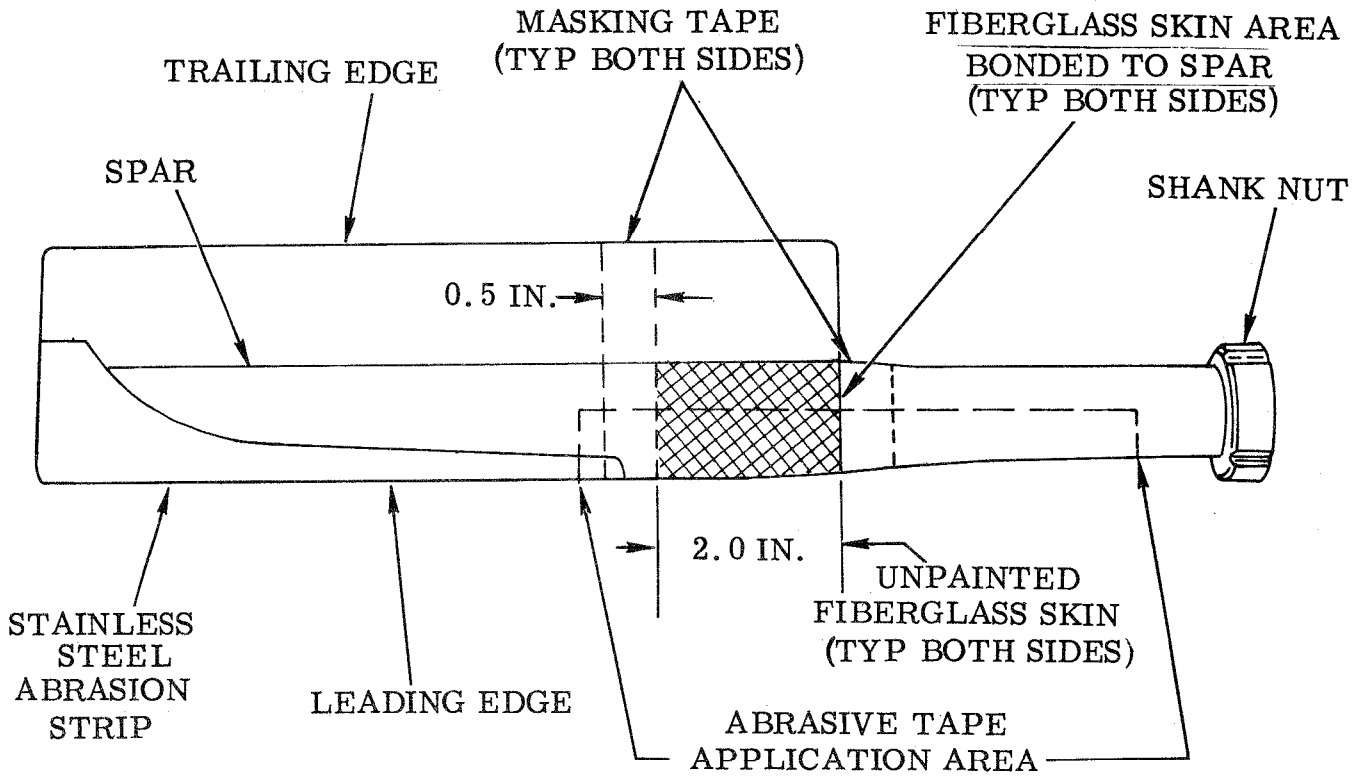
INSPECTION-TAIL ROTOR BLADE ASSEMBLY
